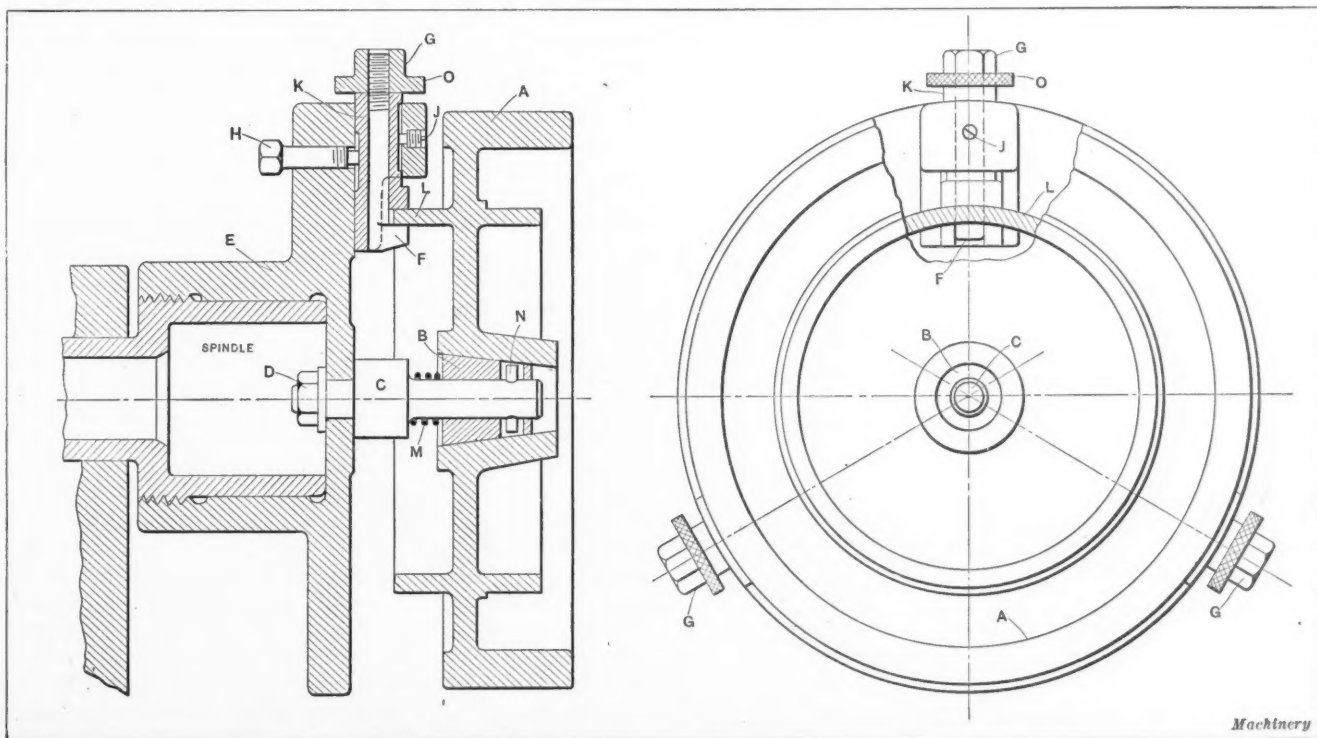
Chucking Fixture with Floating Clamp and Taper Locating Plug
